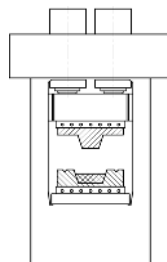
Compression moulding machine shown with mould open and loaded with moulding material
